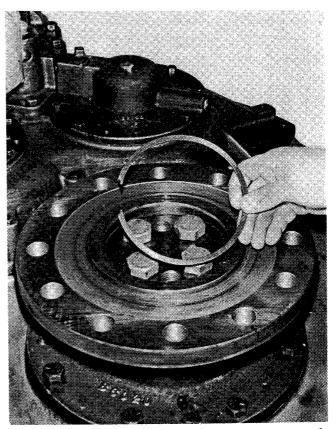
Snap Ring Removed from Bore of Output Flange.
